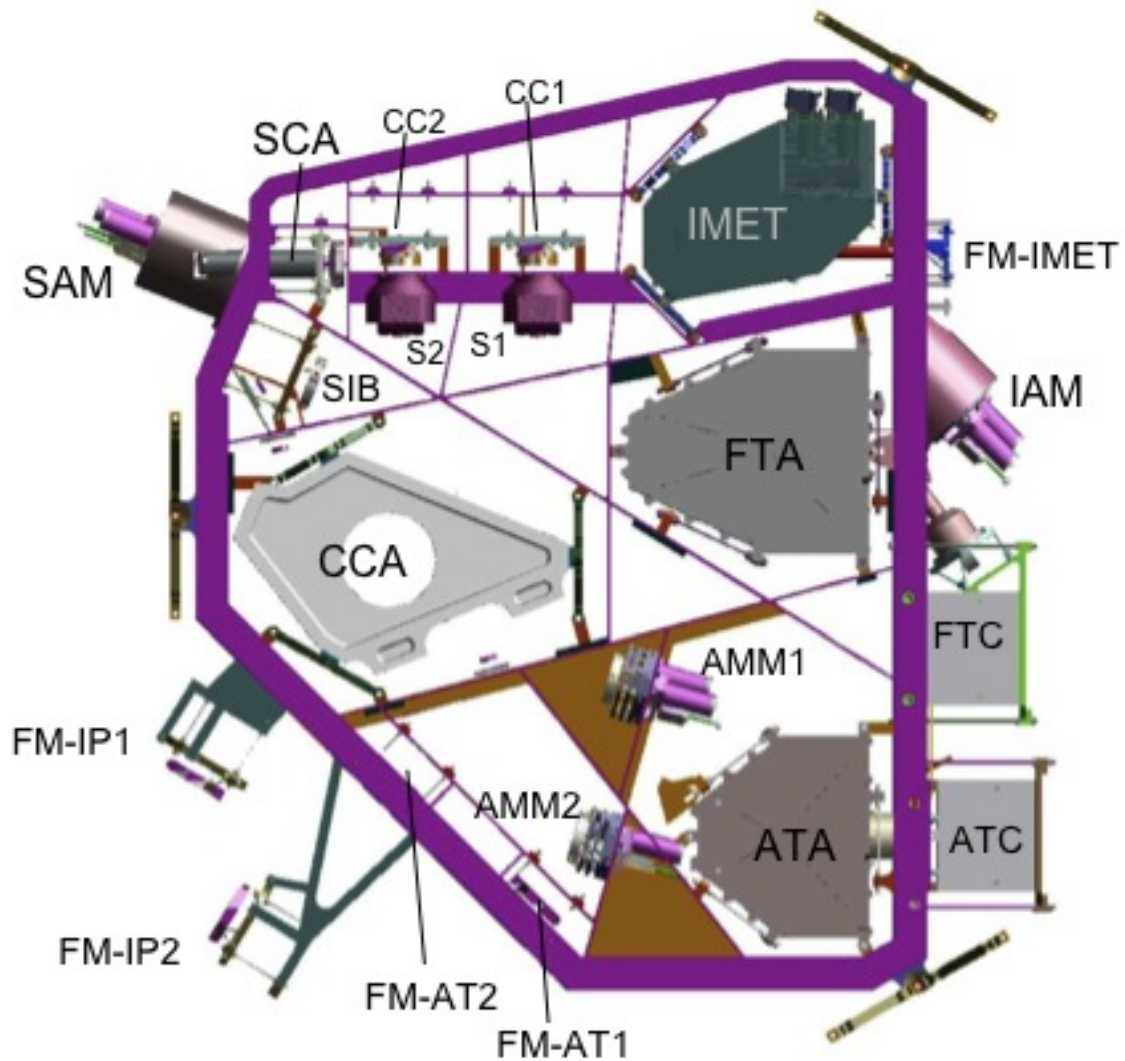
Mechanical layout of the ABC. ATA and ATC are the angle tracker assembly and camera, respectively. FTA and FTC are the fringe tracker assembly and camera, respectively. CCA is the compensated combiner assembly. SCA is the stimulus collimator assembly. IMET is the internal metrology beam launcher. AMM1, AMM2, IAM and SAM are all identical alignment mirror mechanisms. CC1 & CC2 are the cornercubes for calibration. S1 & S2 are shutter mechanisms. SIB is the stimulus injection beamsplitter. FMs are all simple fold mirrors that are adjustable during assembly on ground.
